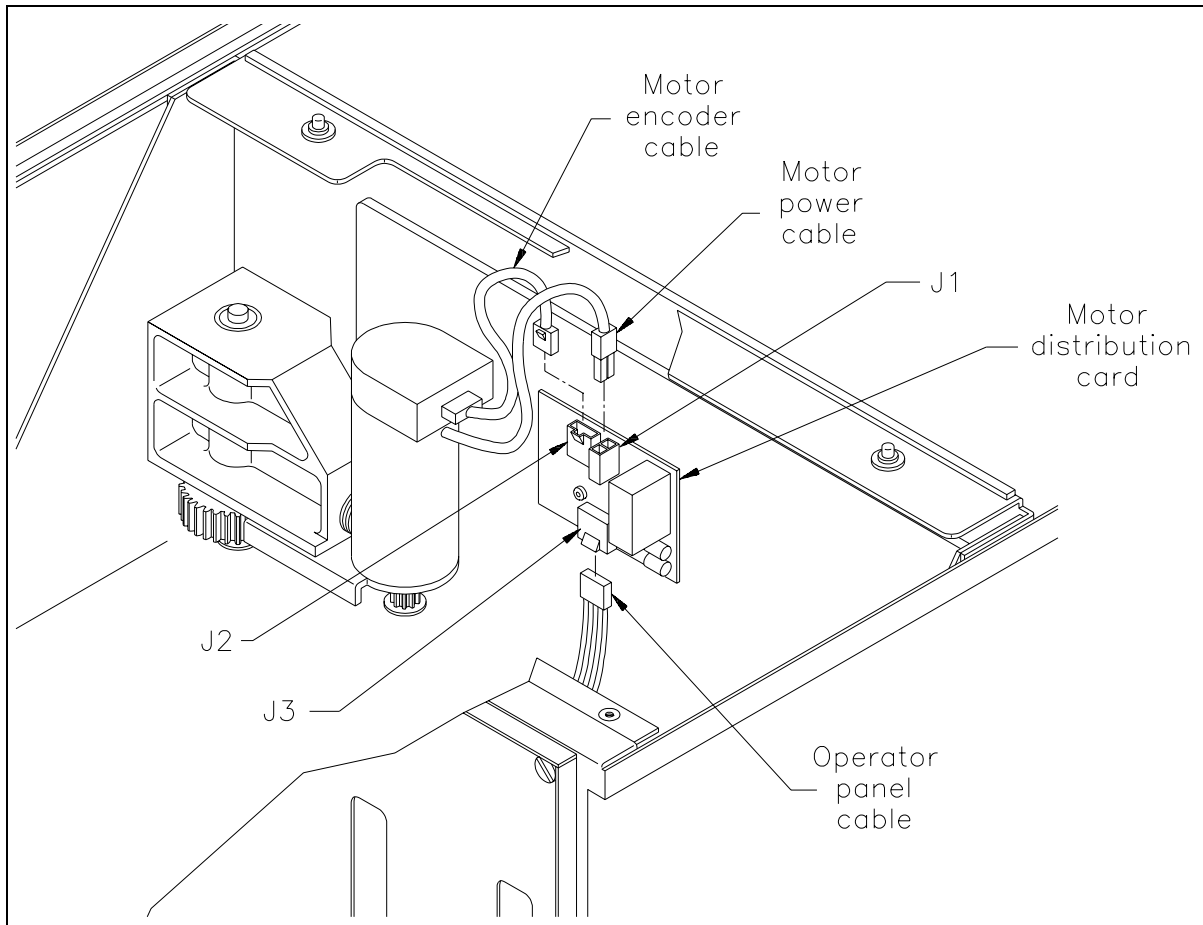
Connecting the operator panel cable to the J3 connector on the motor distribution card
